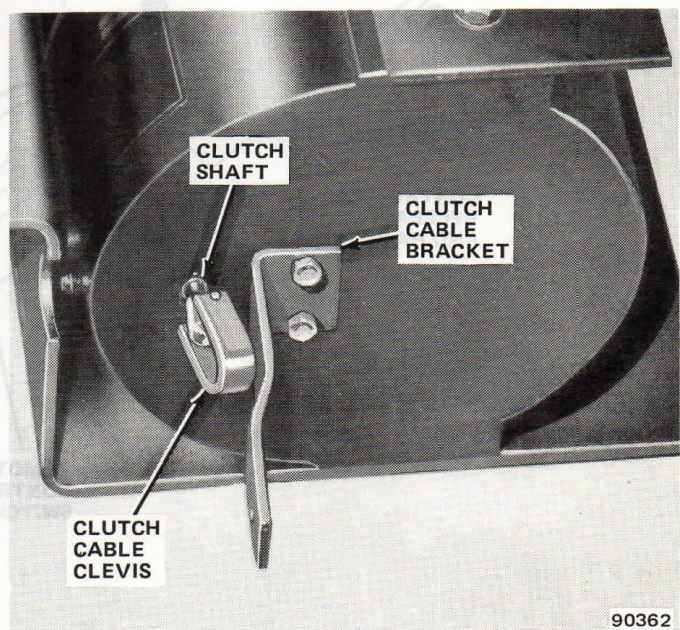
Clutch Cable Clevis and Bracket Installation
